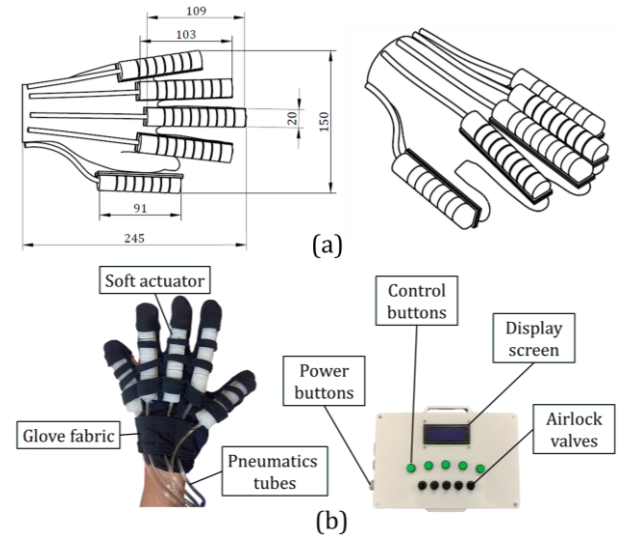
(a) 3D CAD model and (b) physical prototype of the wearable glove
